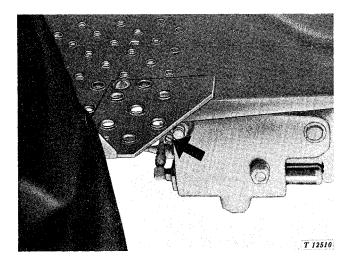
Reverser Speed-Of-Shift Adjusting Screw
